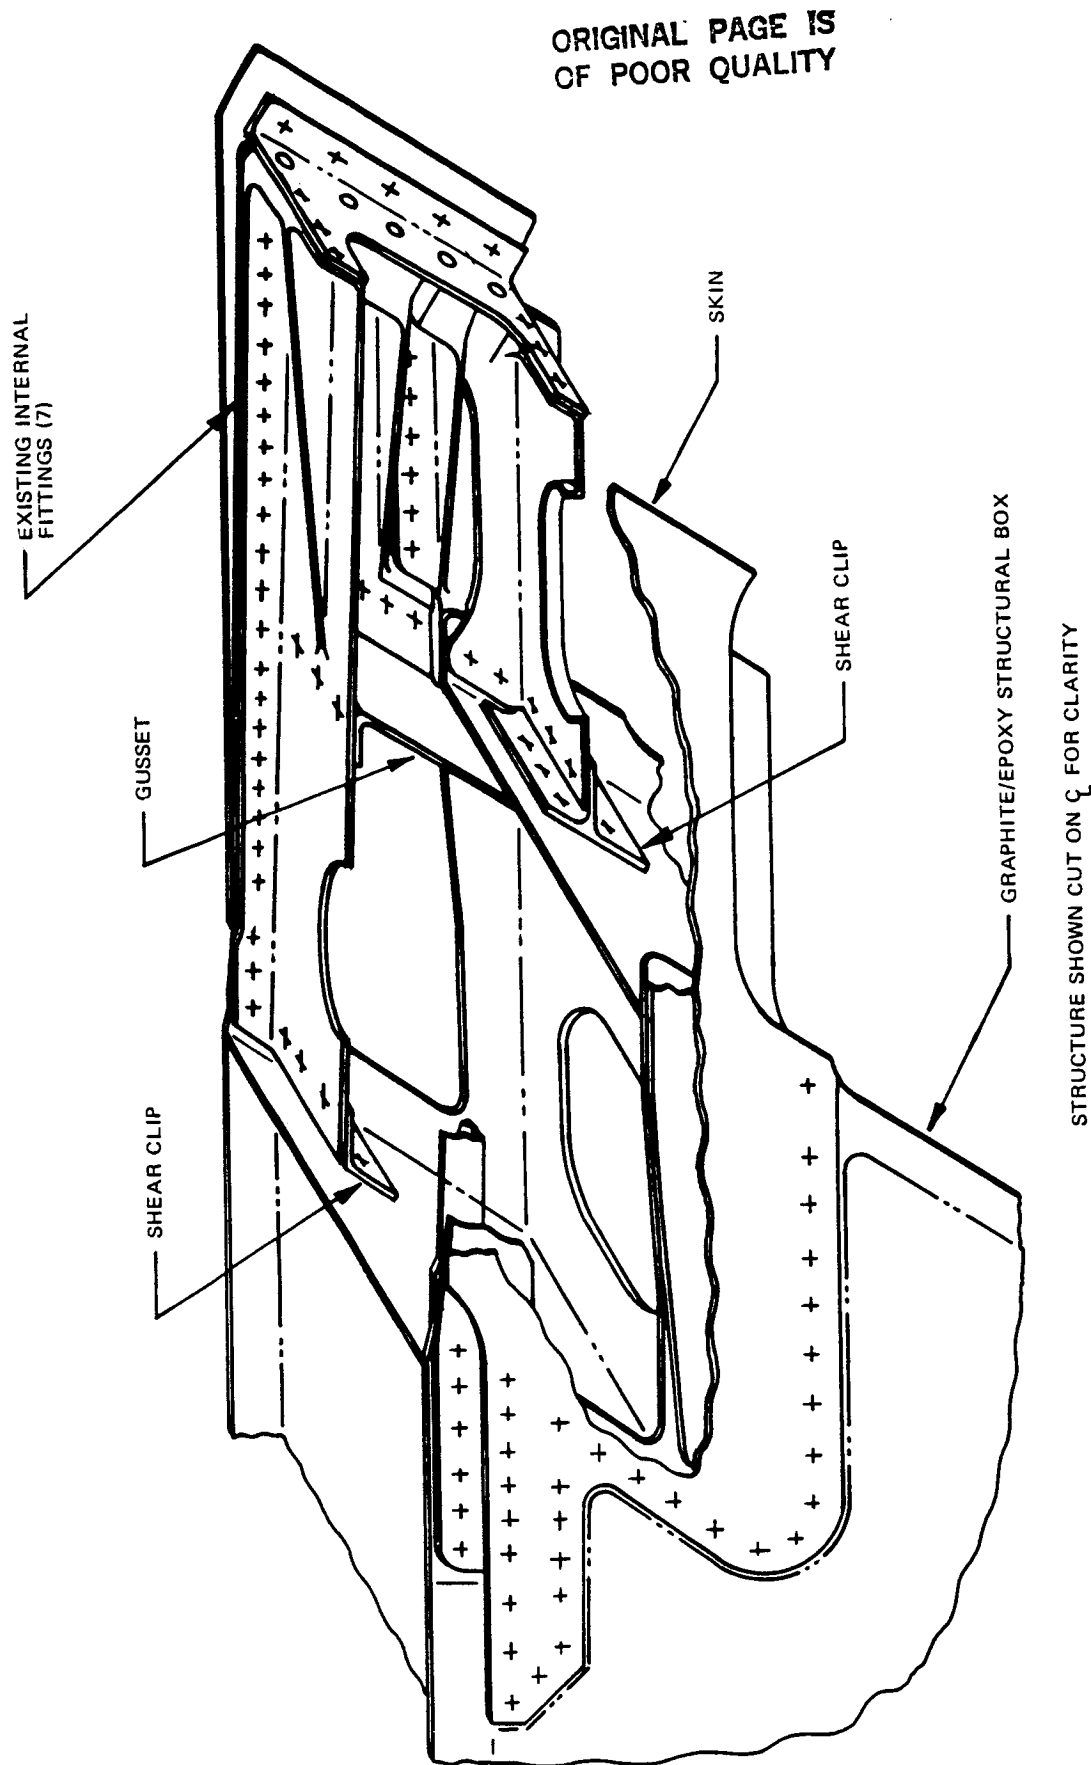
UPPER HINGE SUPPORT ASSEMBLY
